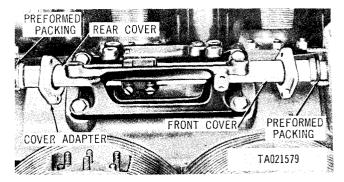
Disconnecting or connecting front and rear fan drive covers.
